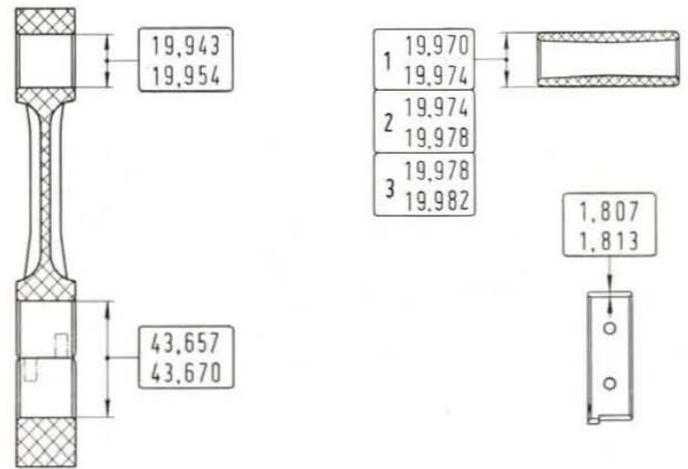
Critical dimensions (metric) of connecting rod, rod bearing insert and piston pin. (Late type)
